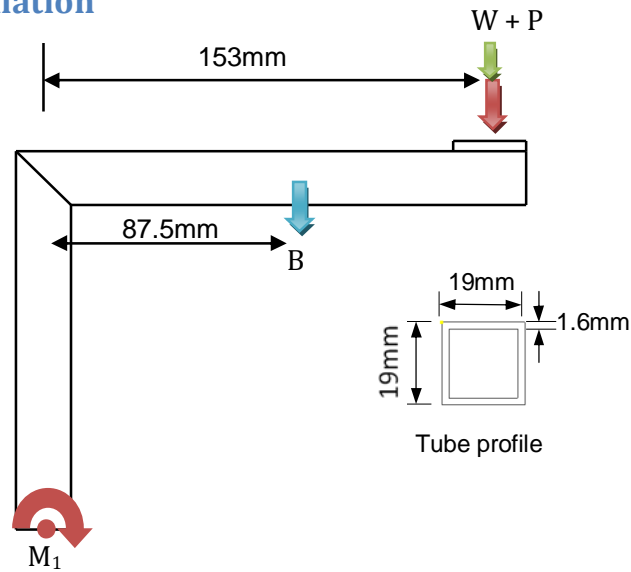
Weld 1 moment diagram with tube profile
